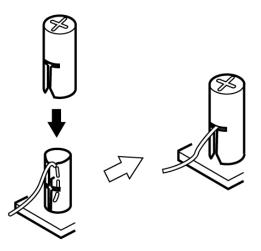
Attaching Cables to the AD(A)-R Unit
